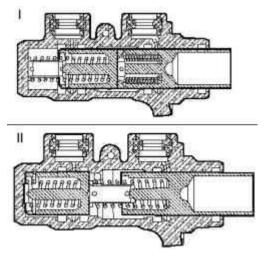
Job master brake cylinder with a failure of the primary and vtoroichnogo circuit brake system
